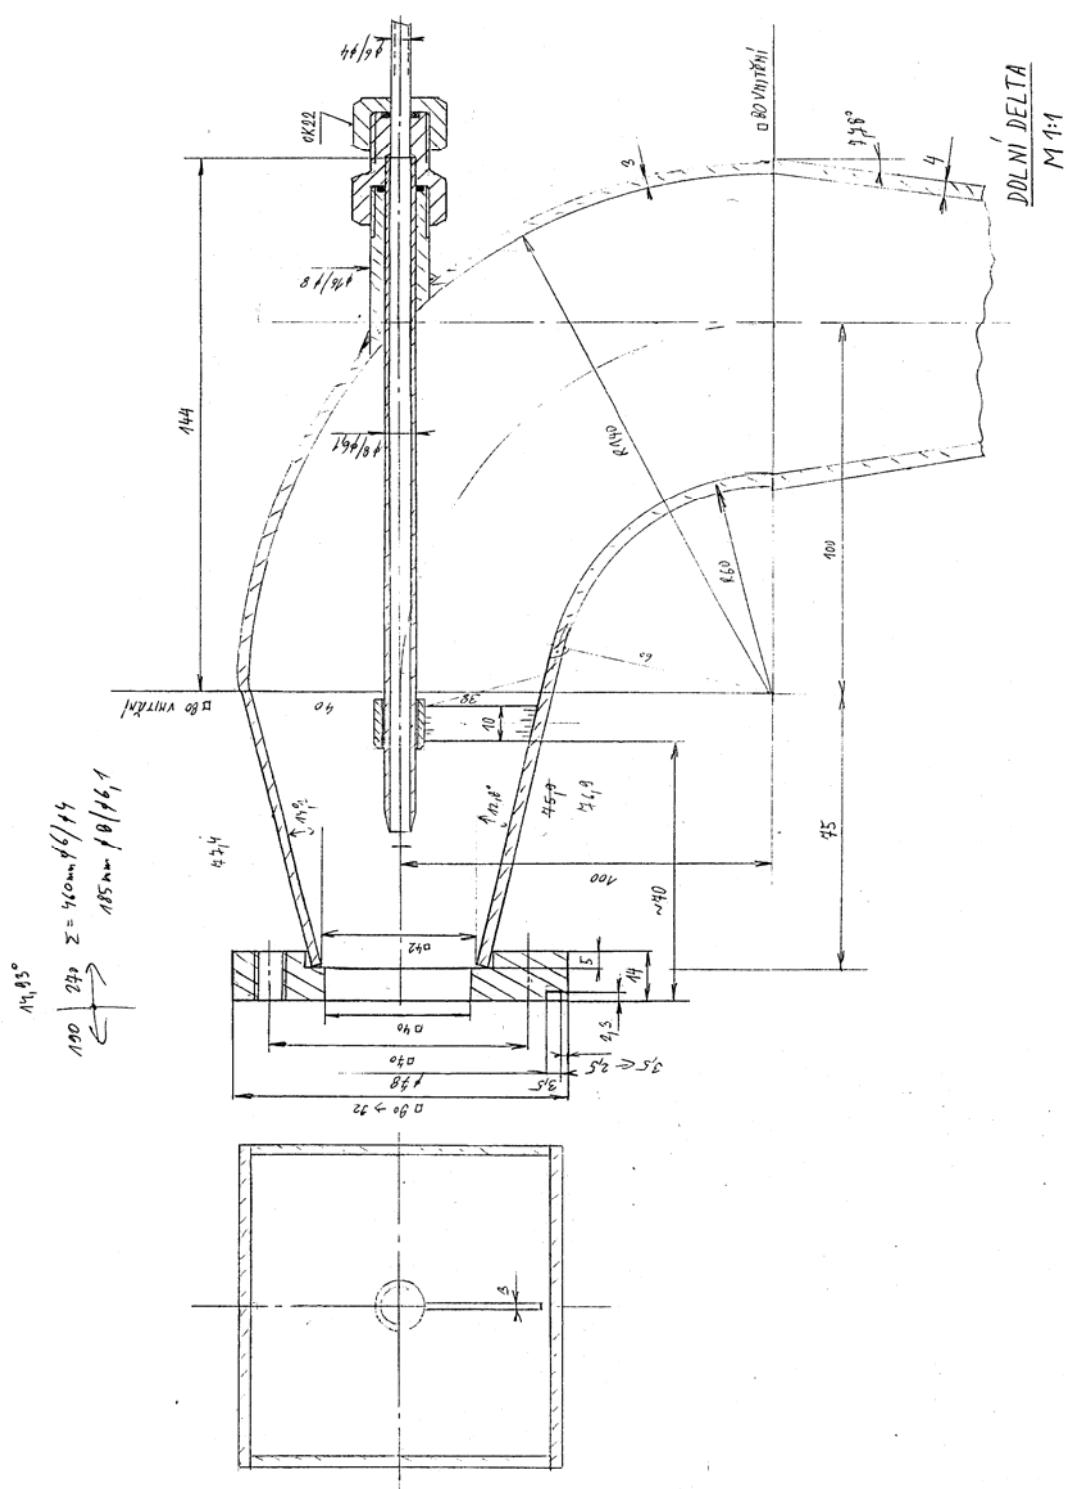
Side section of the inlet delta element with holder of the Pitot tube
